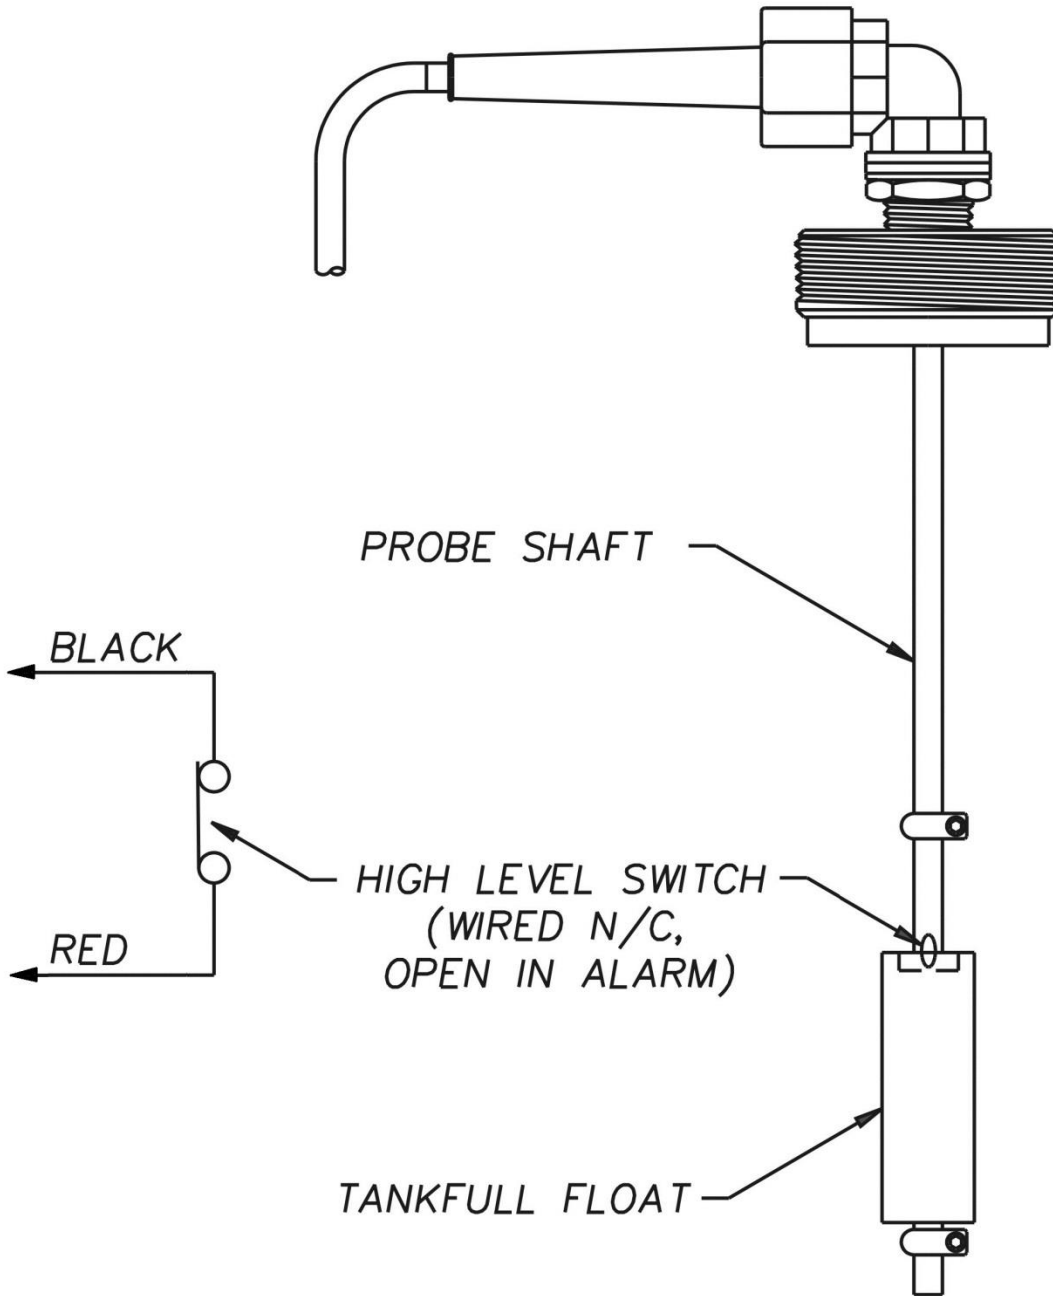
Wiring a Tankfull probe to the GECM control panel.
